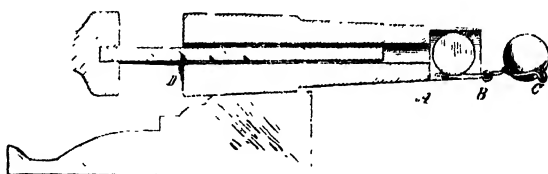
is a perspective view of the gun, showing it immediately after its discharge, and Fig. 30 is a longitudinal section showing the gun ready to be discharged. The gun consists of a wooden barrel chambered at the muzzle to receive the marble and provided with a rod attached to the breech piece, extending into the barrel and arranged to be propelled forward by a strong elastic rubber cord stretched over the breech piece, with its ends nailed to the sides of the gun barrel.
